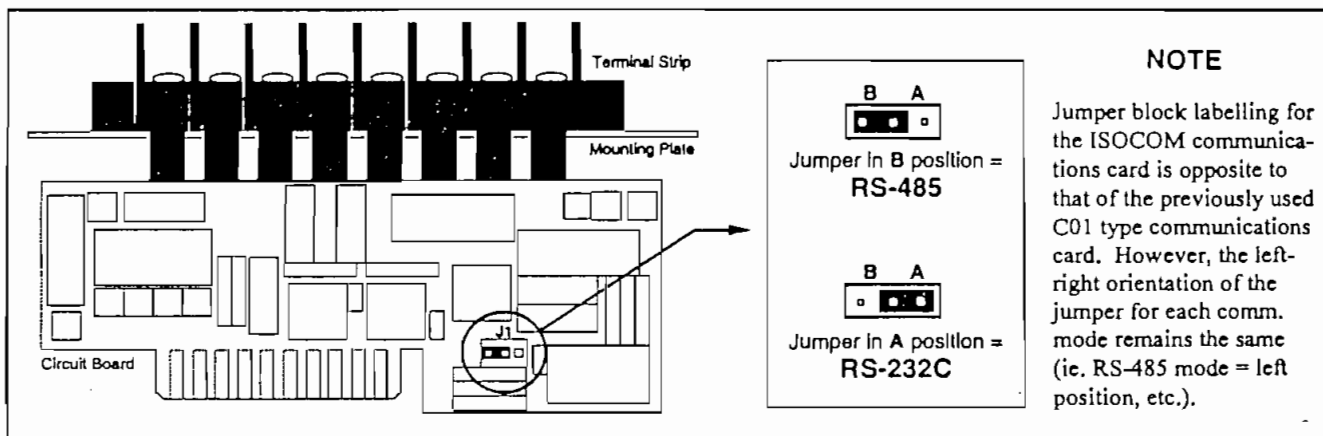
Communication Card Jumper Configuration (ISOCOM Type)
